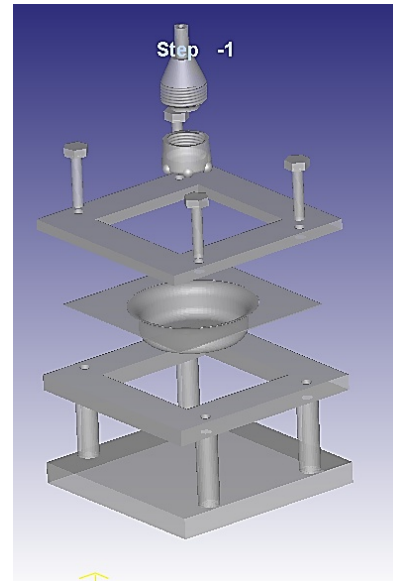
Dismantled view of the specimen, forming tool and the fixture in Deform 3D
